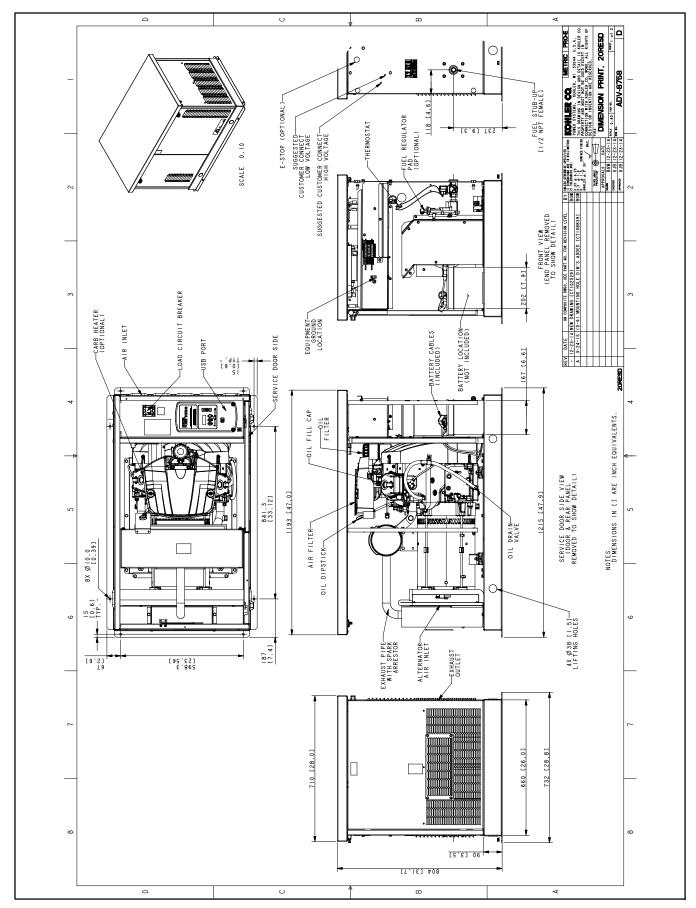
Dimension Drawing, Model 20RESD, ADV-8758, Sheet 1 of 2
